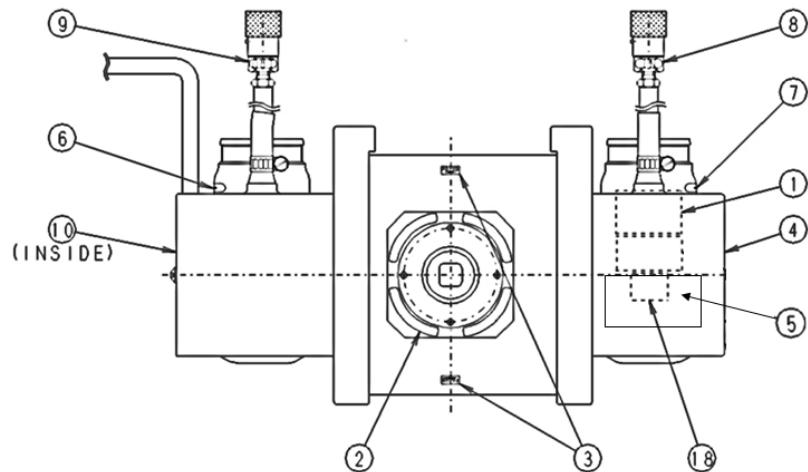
LABELS ON X-RAY TUBE ASSEMBLY
